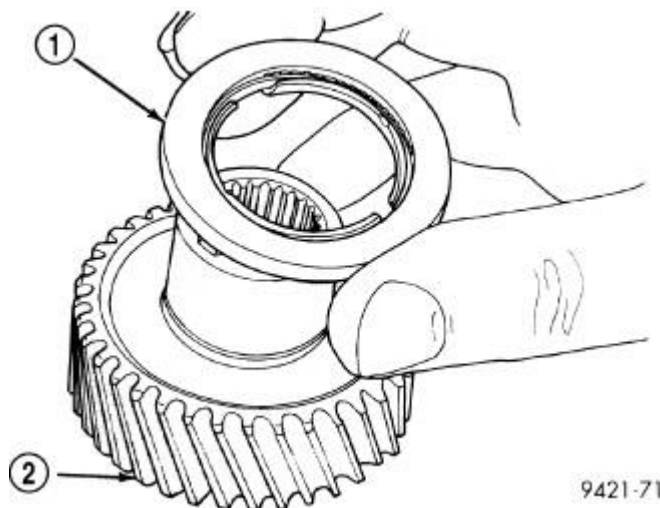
Remove/Install Rear Sun Gear & No. 7 Bearing
